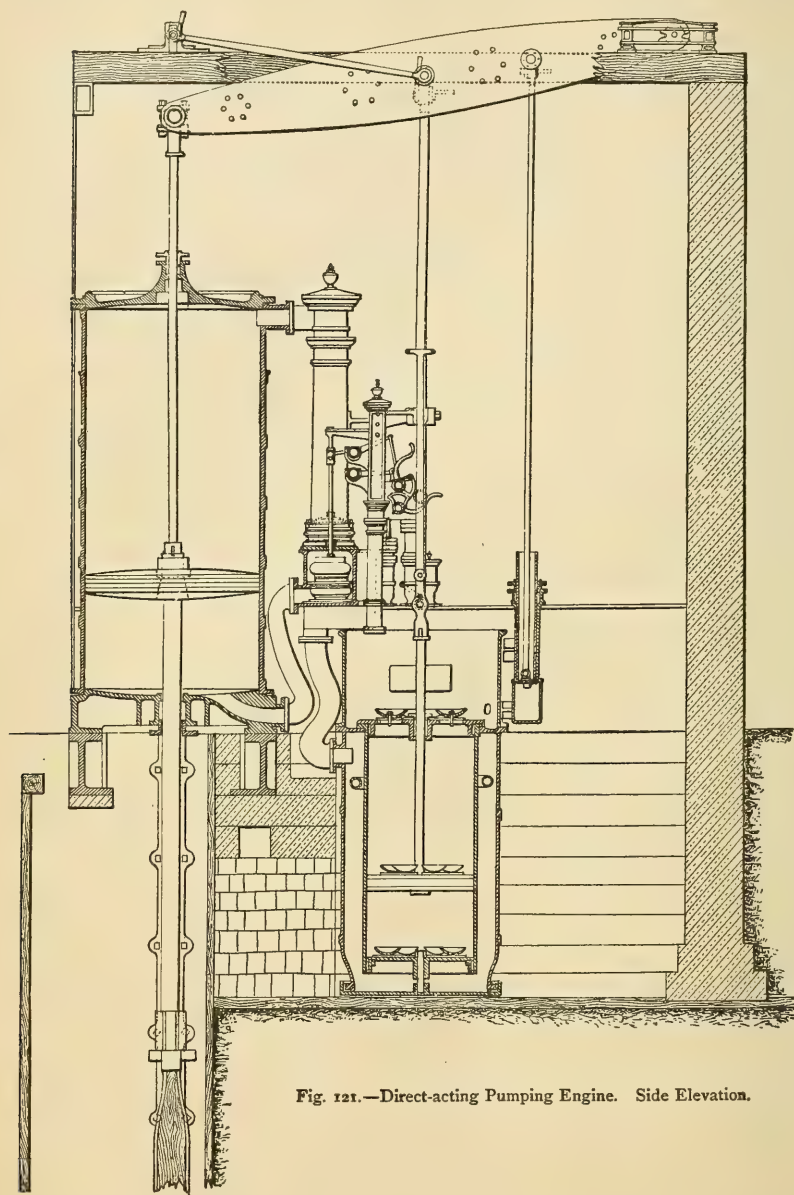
Direct-acting Pumping Engine. Side Elevation.
